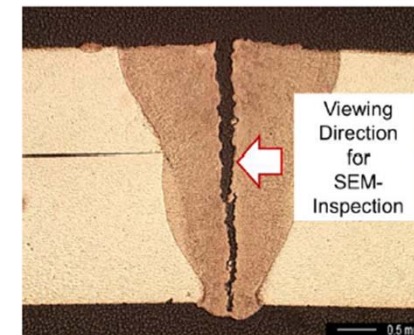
Cross section of the weld seam in the highly crack-sensitive test specimen.
